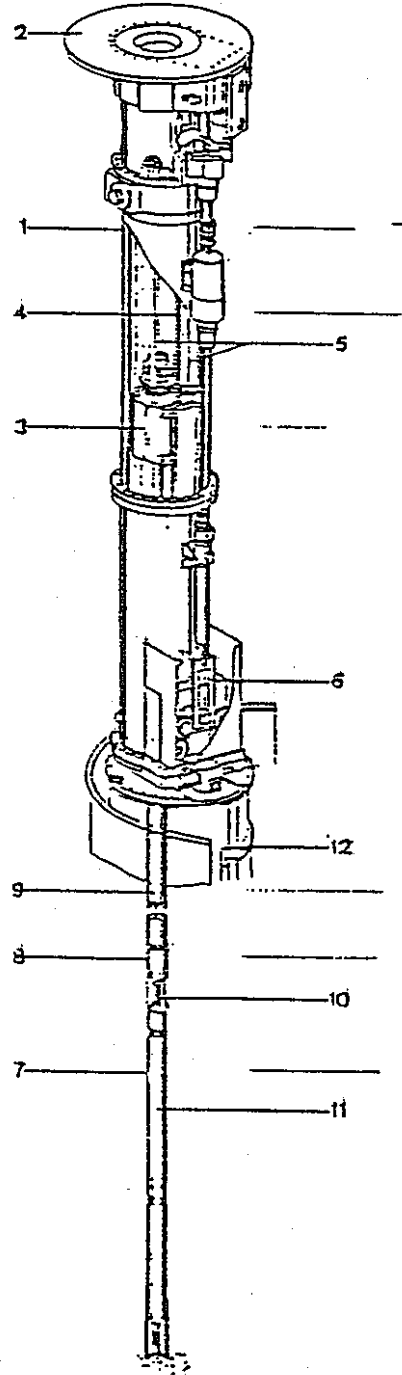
In-Vessel fuel handling machine. (SNR-300)
